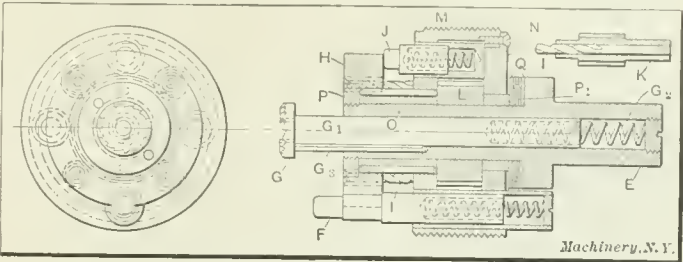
End and Sectional Views of the Four-hole Turret Drill-holder, showing its Construction
